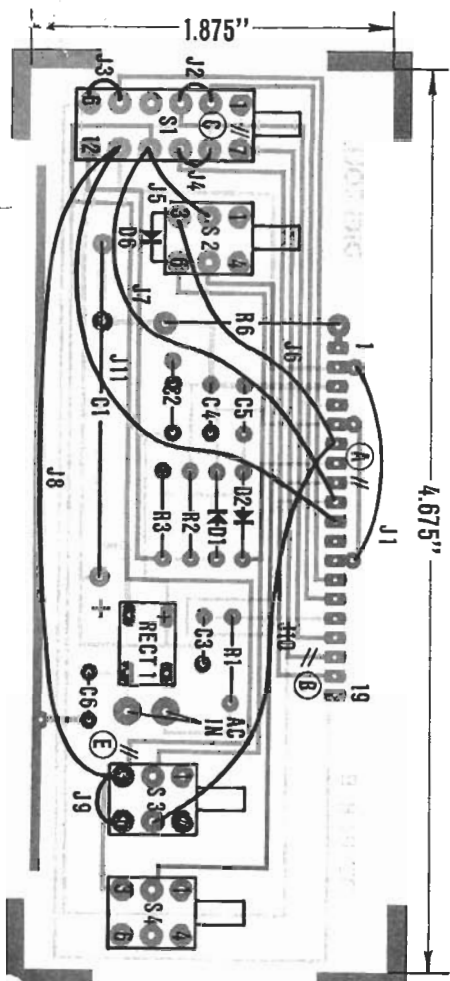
COMPONENT PLACEMENT for the back board. Check locations of jumpers and foil breaks used in the various *Digi-Toll* options.
